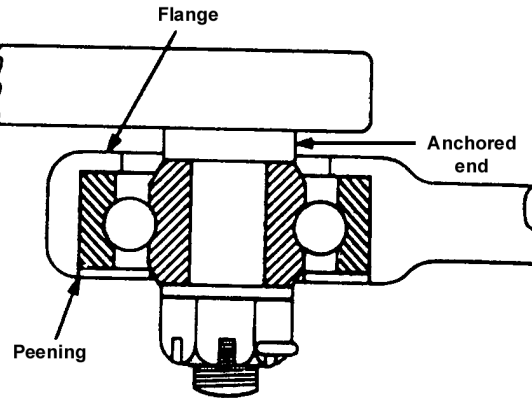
Rod end flange interposed between the bearing race and the end of the attaching bolt.
